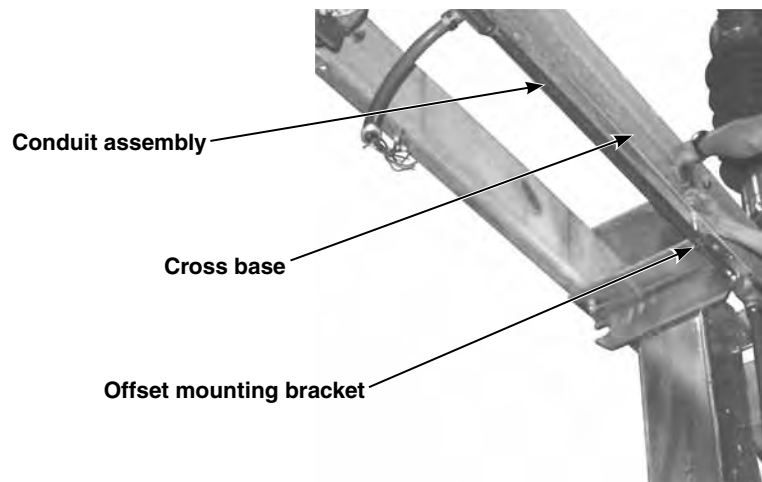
Using the offset mounting brackets, attach the conduit assembly to the cross base.
